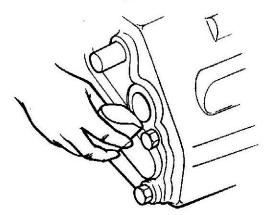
Collecting Excess Lubricant with Paper Cup.
